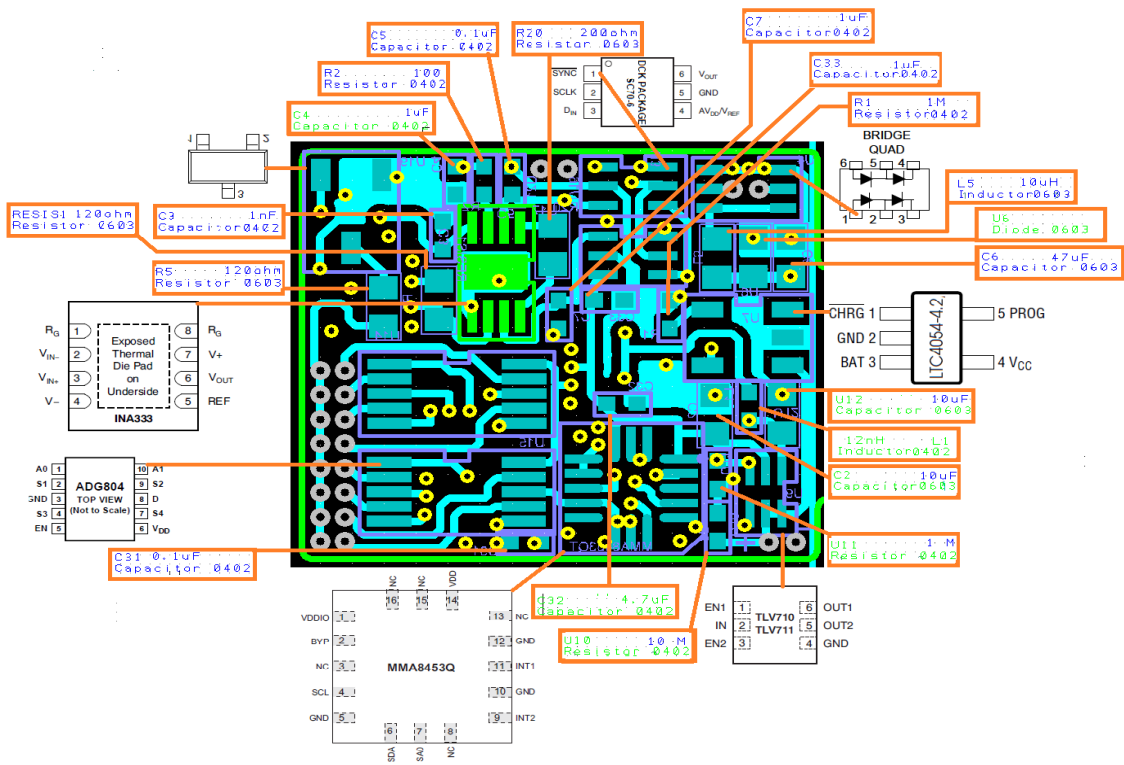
Components placed in the bottom layer of the eight channelled telemetry unit of dimension 24 mm x 13 mm
